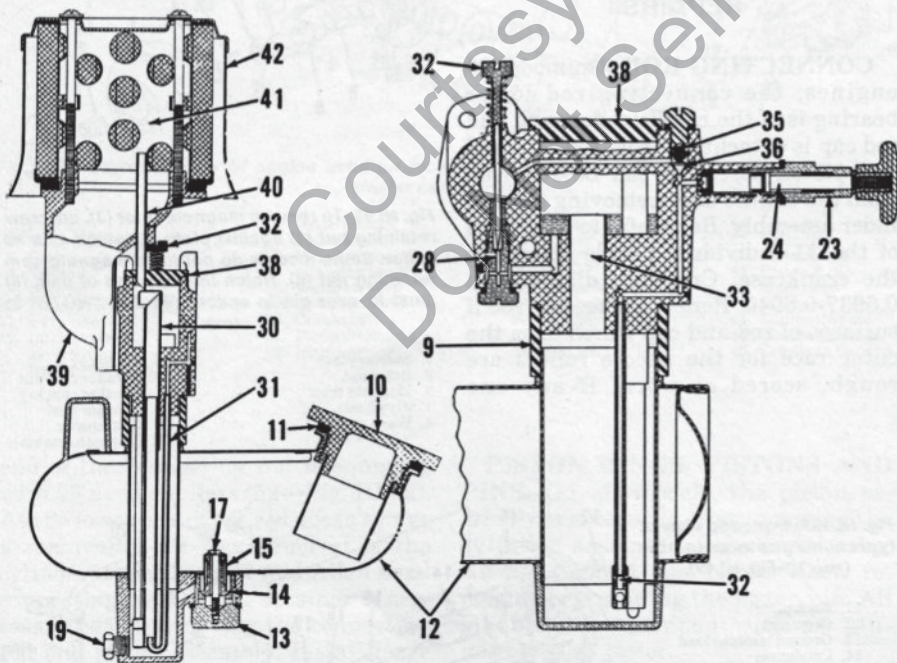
Cross-sectional view of Homelite carburetor. Refer to Fig. HL43 for additional legend and exploded view of complete fuel system.
